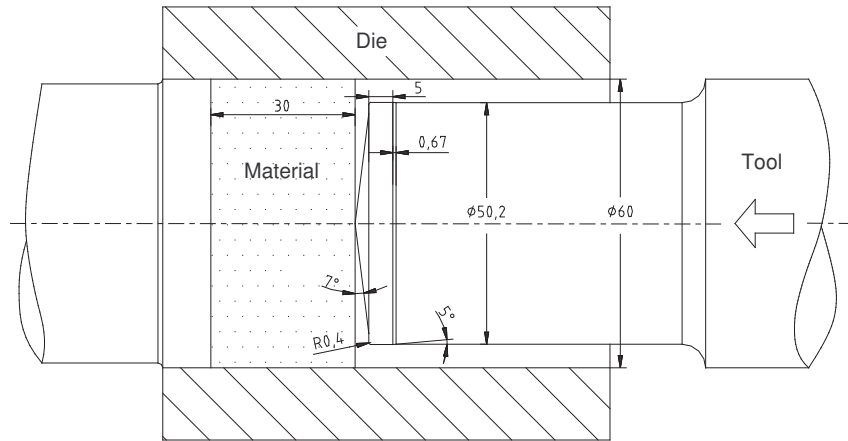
Backward extrusion. Problem geometry (dimensions in [mm]).
